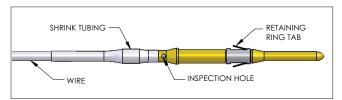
Figure C. The shink tubing must be adjacent to, but not cover, the inspection hole.
